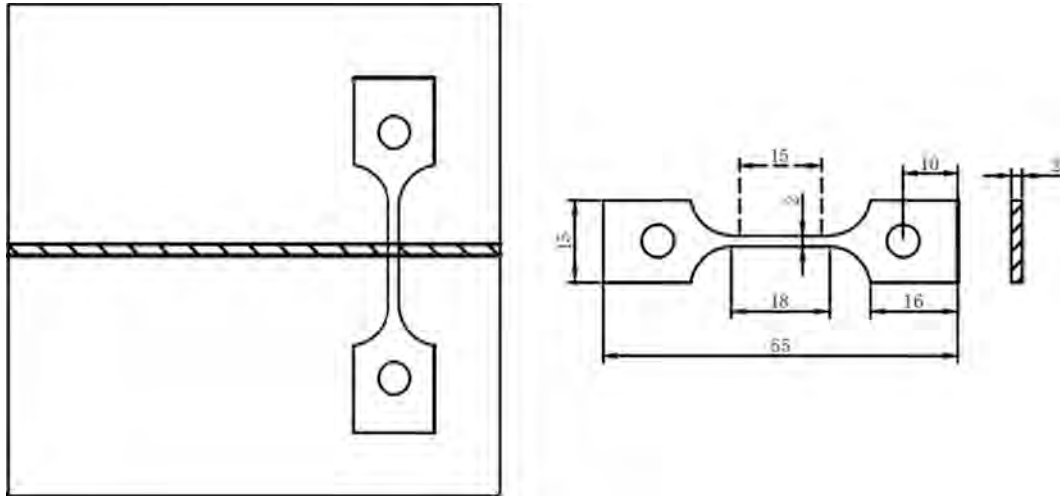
Dimensions and sampling location of tensile specimens (in mm).
